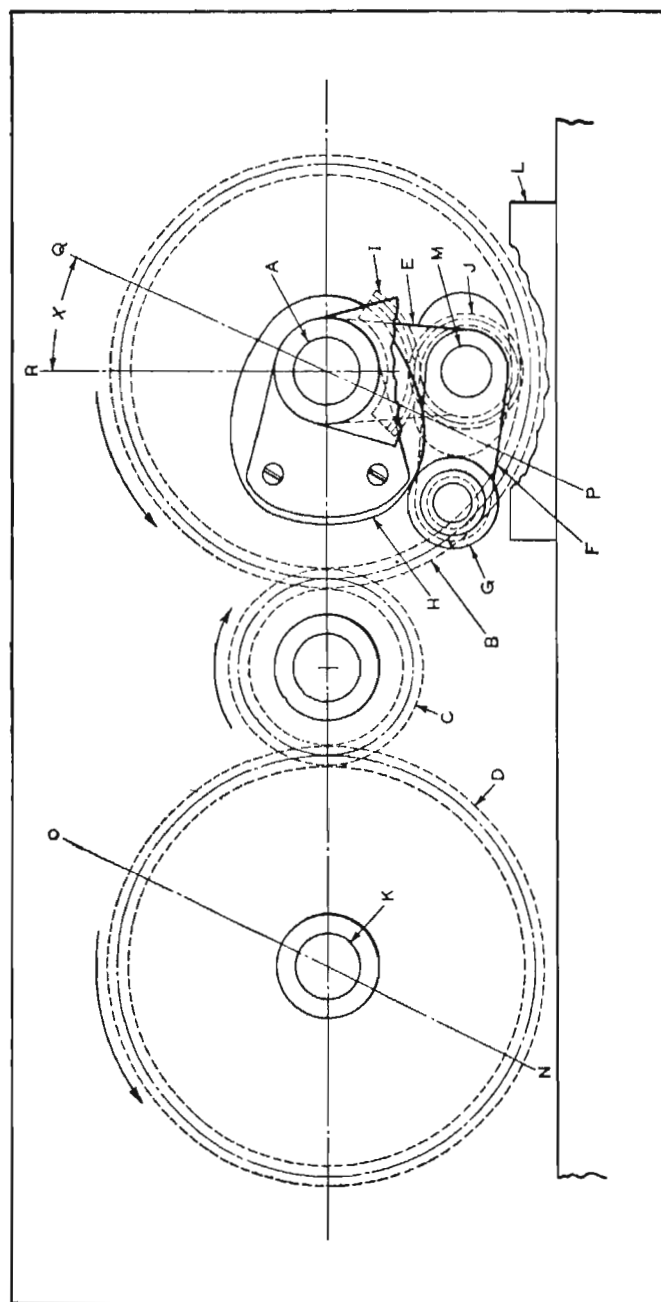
Diagram Showing Mechanism in Fig. 5 after Shaft A has Rotated 180 Degrees.
